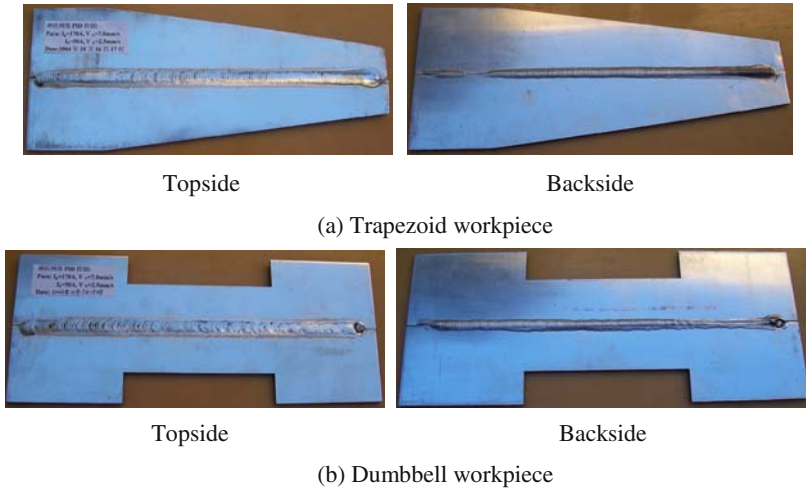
The workpiece pictures of adaptive neural PID controlled welding on the LAIWR
